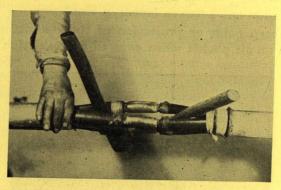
Connectors are soldered solidly into place and all burrs smoothed off.
